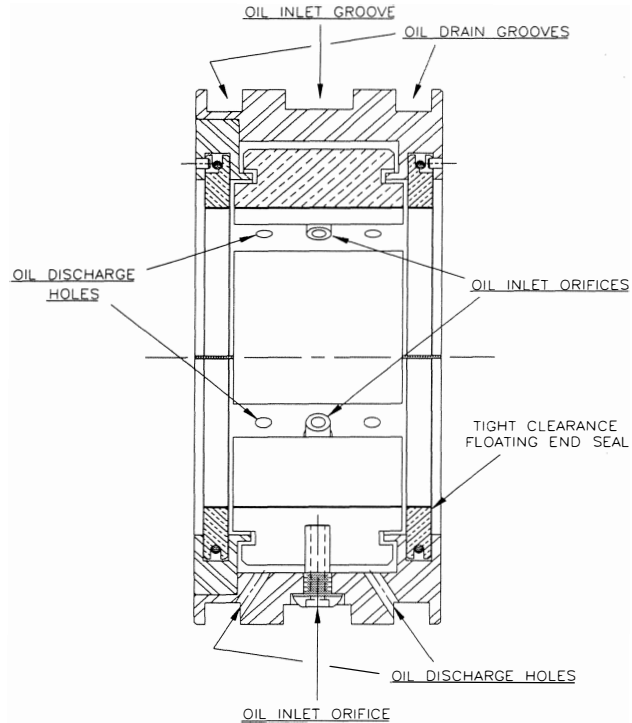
Pressurized Housing Tilt Pad Bearing Design with Oil Inlet Nozzles.
